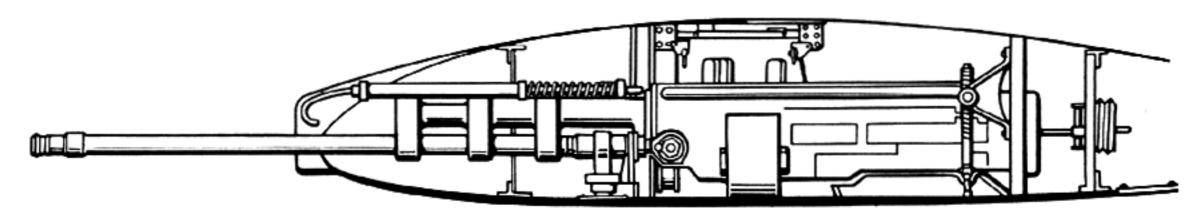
11. Method of mounting the VYa Gun in the wing of the Soviet IL-2 Airplane.
